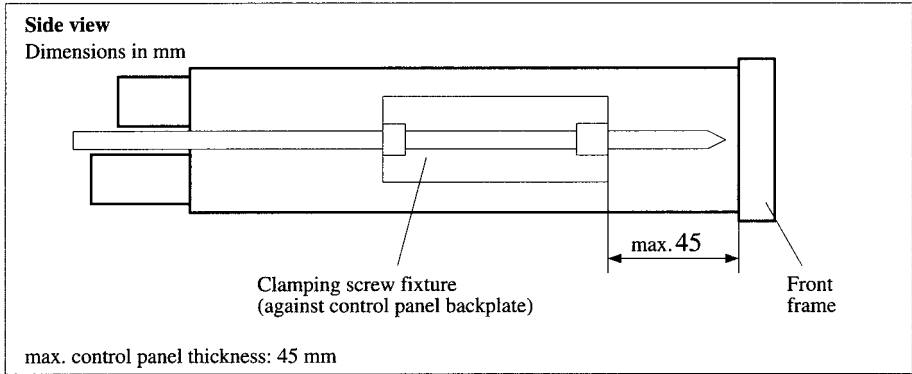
DAA 144-120 Mounting dimensions, side view
